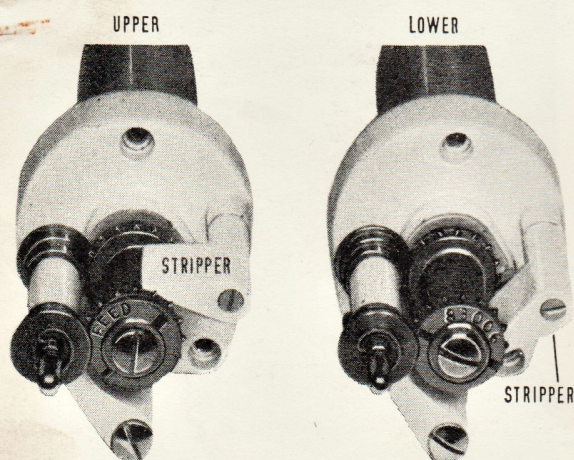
ALTERNATIVE STRIPPER POSITIONS ON UPPER AND LOWER SPROCKET SHAFTS
